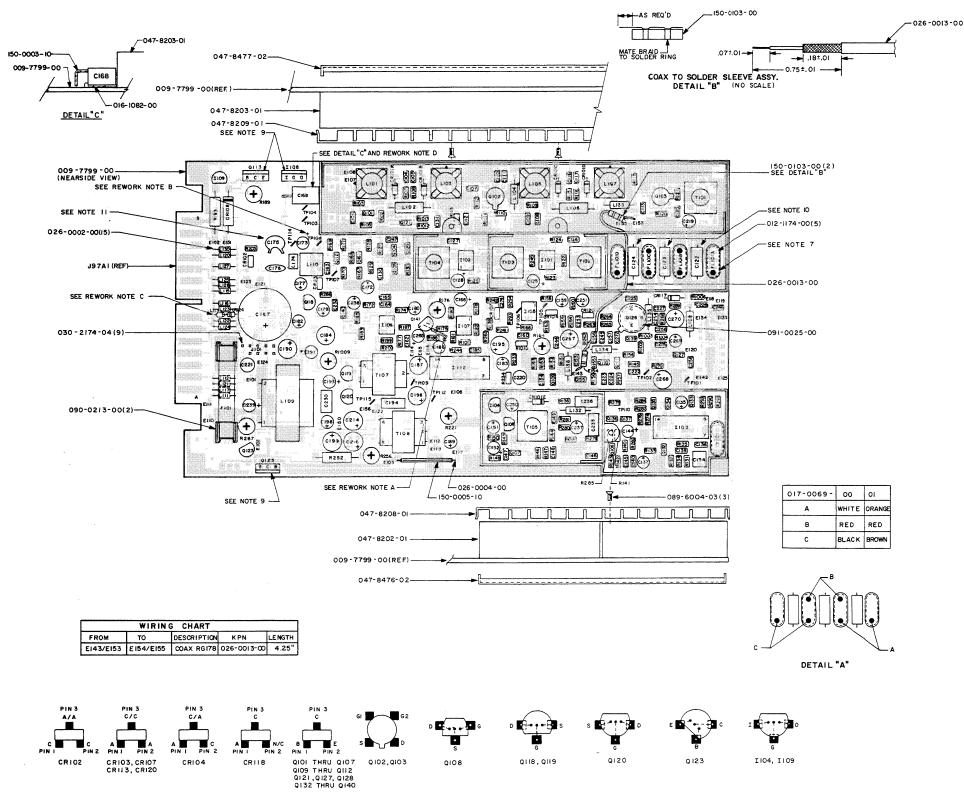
B KY 97A (14V) Main Board Assembly (Sht 1 of 2) (Dwg No 300-07799-0000, Rev 17)
